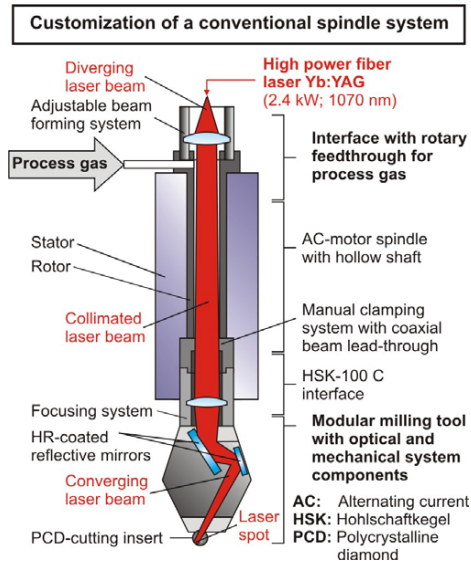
System design concept of a conventional motor spindle with modular optical and mechanical system components and interface for the laser-assisted milling of advanced materials
